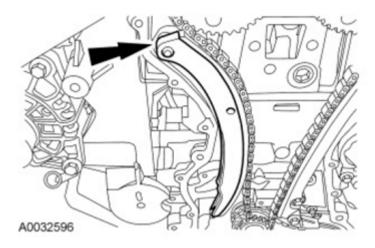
Locating Timing Chain Tensioner Arm Courtesy of FORD MOTOR CO.
